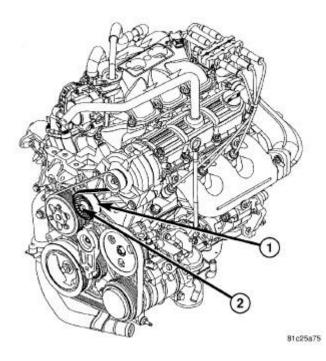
Removing/Installing Idler Pulley Courtesy of CHRYSLER LLC
